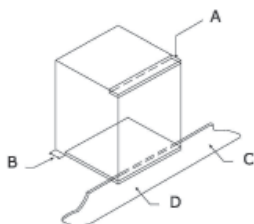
Installation distanced for simple electric ovens of 60 cms wide (the shape of the upper casing may vary) and attachment to the cupboard.
